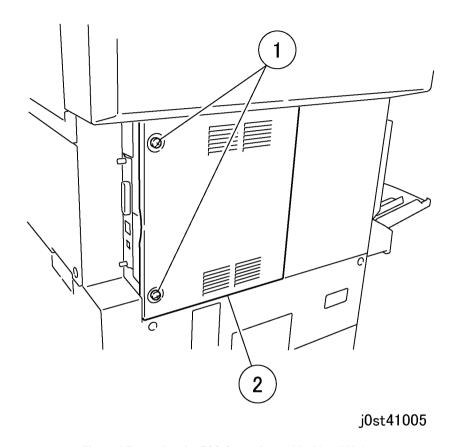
Removing the ESS Cover Assembly (j0st41005)
